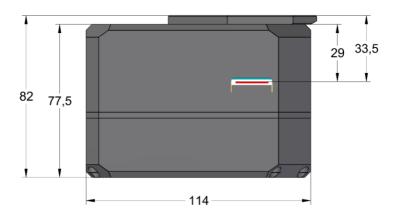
C2 camera head with Internal Filter Wheel side view dimensions
